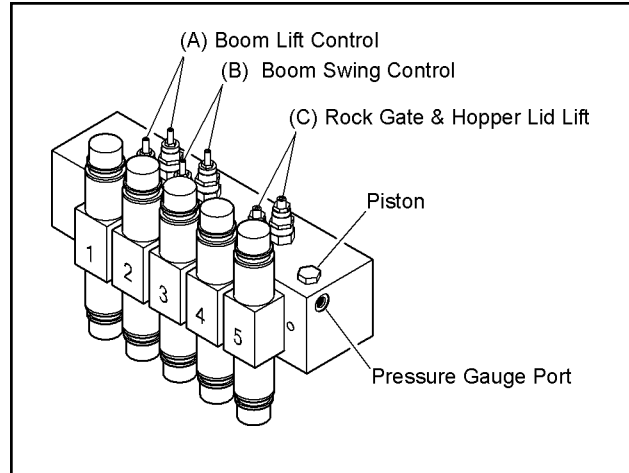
HYDRAULIC MANIFOLD - VIEW 2
